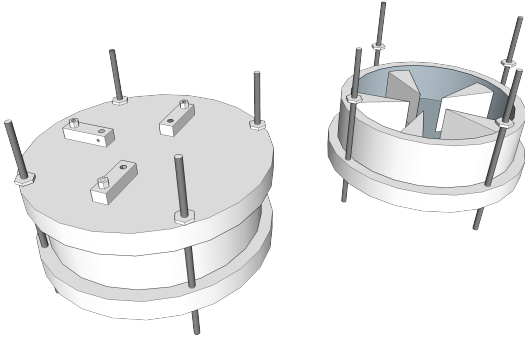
A 3D rendering of the second aluminum cavity, almost half the size of the first design. Dimensions: 4 1/2" OD, 4" ID, 1.13" tall. Aluminum caps with 1/2" thickness, 5" in diameter
